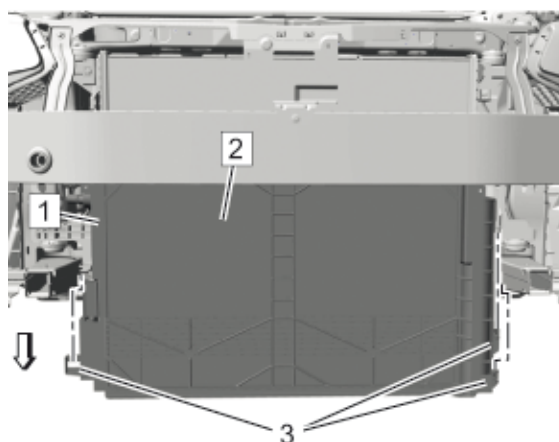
Air Conditioning Condenser, Bracket And Retaining Tabs
